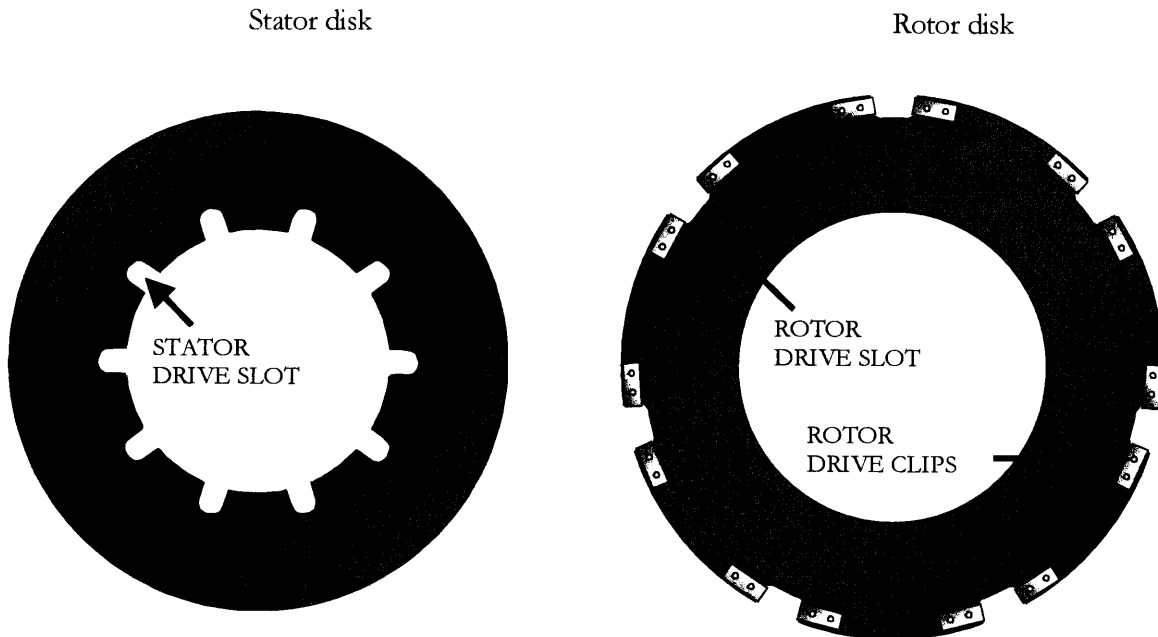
Illustration of a Carbon Stator and Rotor Disk
